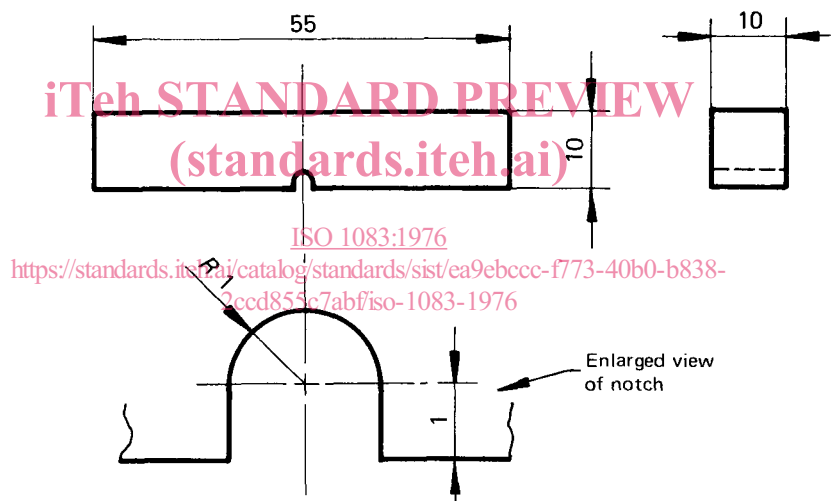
Dimensions of Mesnager U-notch test piece for the impact test
